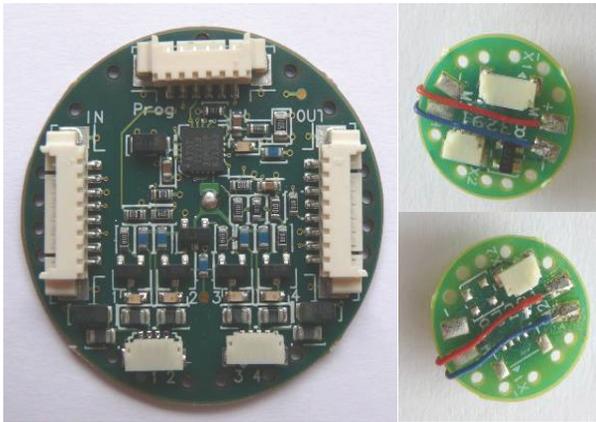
PCB's of a segment driver and an intermediate (upper right) and terminal motor print. (not visible) are placed on the back of the motor prints.
